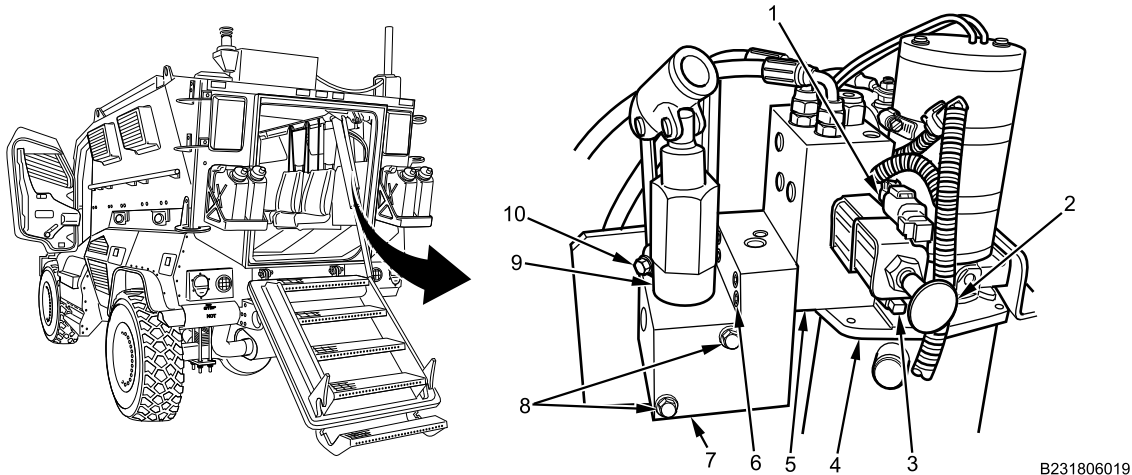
Hydraulic Power Unit Manifold and Module Removal.
